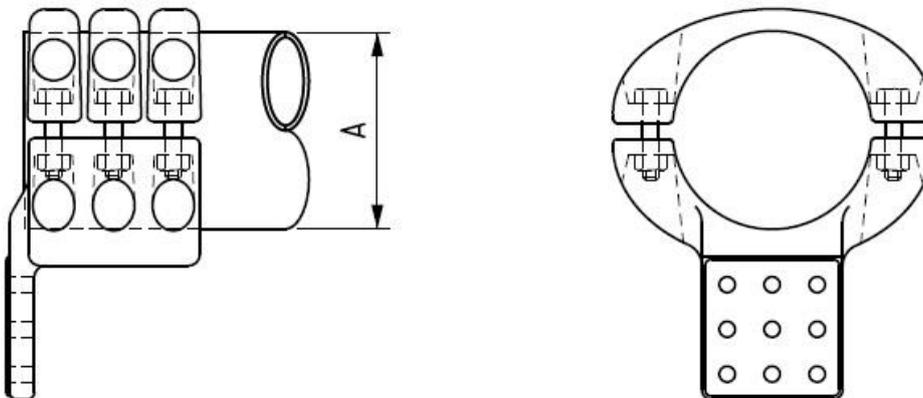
ECC-8HV: Coupling Clamp – 8-Hole Vertical Palm – Equipment Mounted
